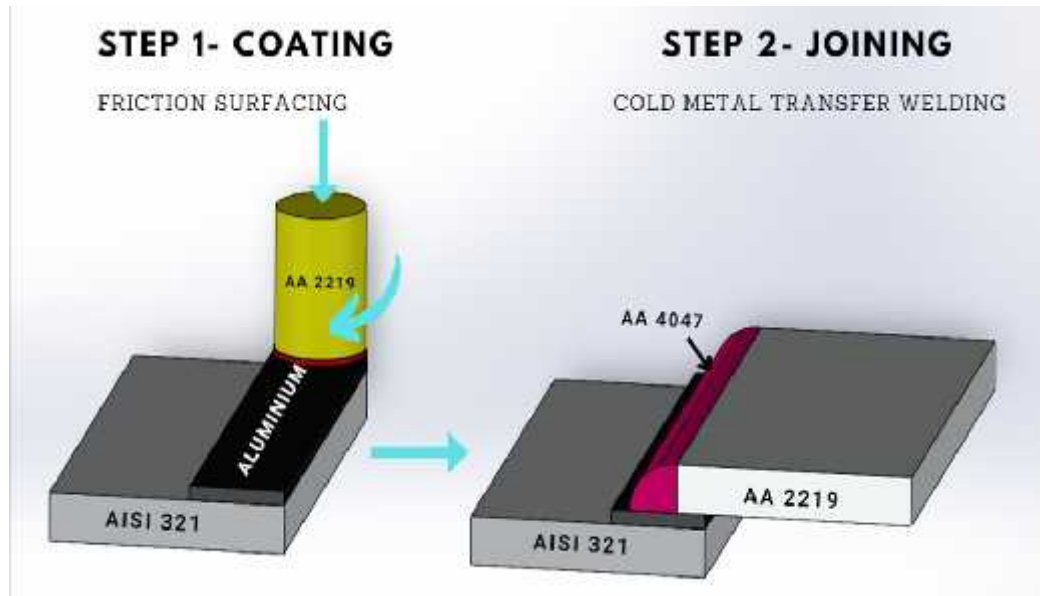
Hybrid Joining Process of AISI 321 Stainless Steel and AA2219 using Friction Surfacing and CMT Welding [47]
